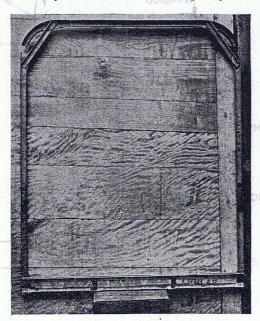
Fuselage Frame of a Rohrbach Land Plane (The bottom beam is fitted with a web securely braced against shear.
